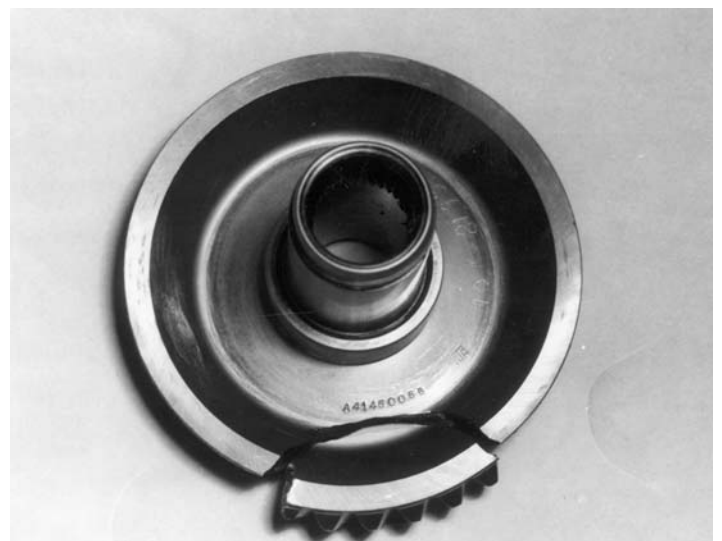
Failed driven gear showing the area of fracture
